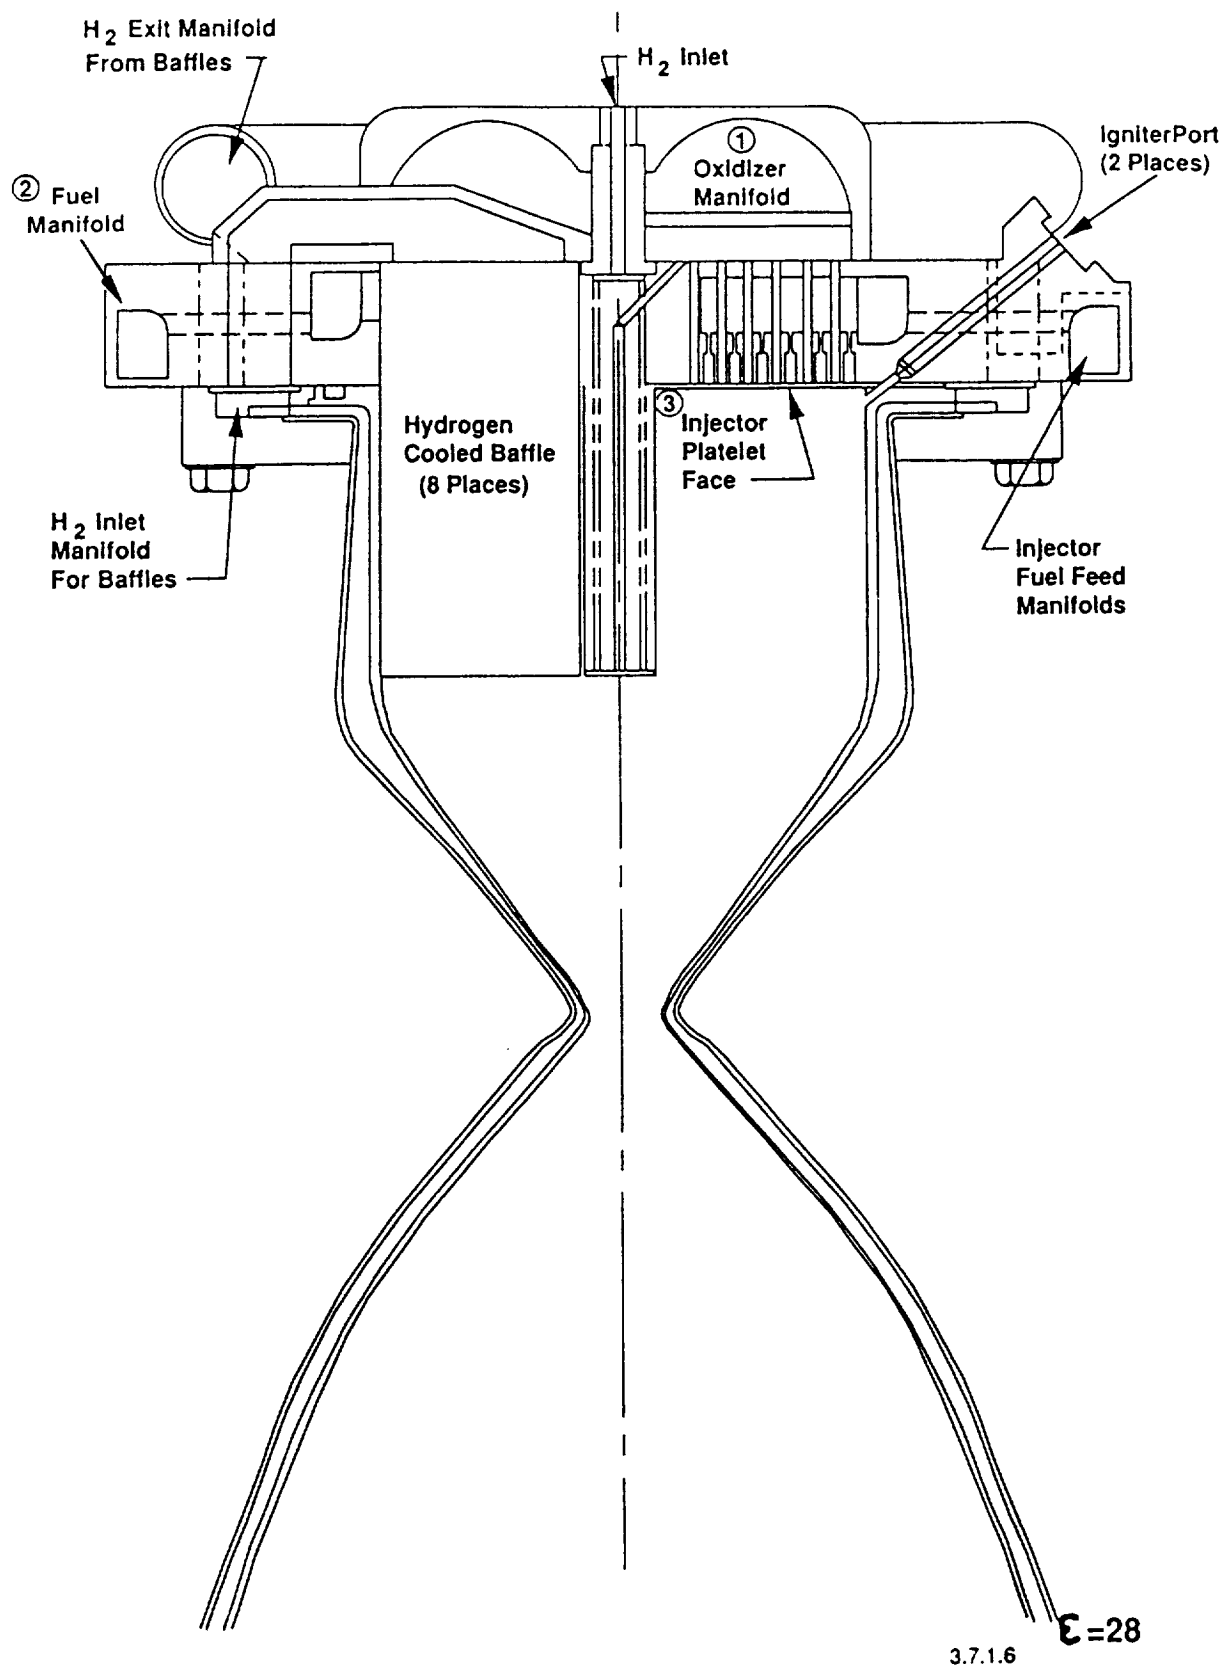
7.5K Thrust Chamber Assembly — Injector Concept
